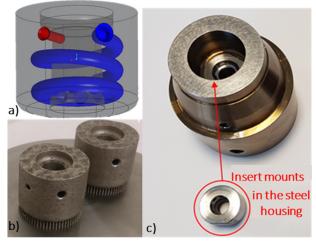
Die set for the experimental trials: a) Design of the insert: cooling channel in blue, hole for the thermocouple in red; b) Manufacturing of the insert with the SLM machine; c) The die set before insert assembling
